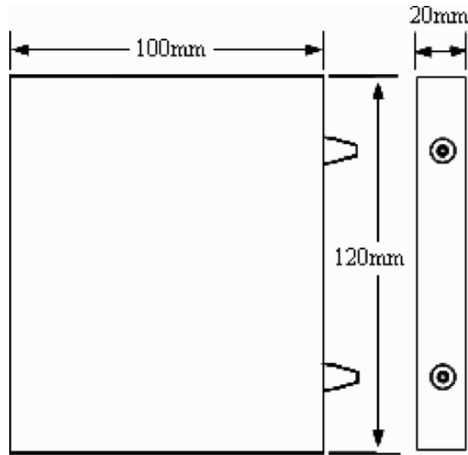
Package appearance of compact dispersion adjusting module (Module-2).
